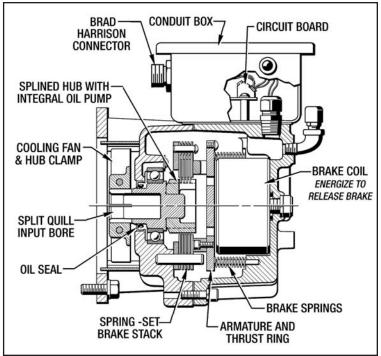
MagnaShear "Quick Mount" Motor Brake Cross Section
